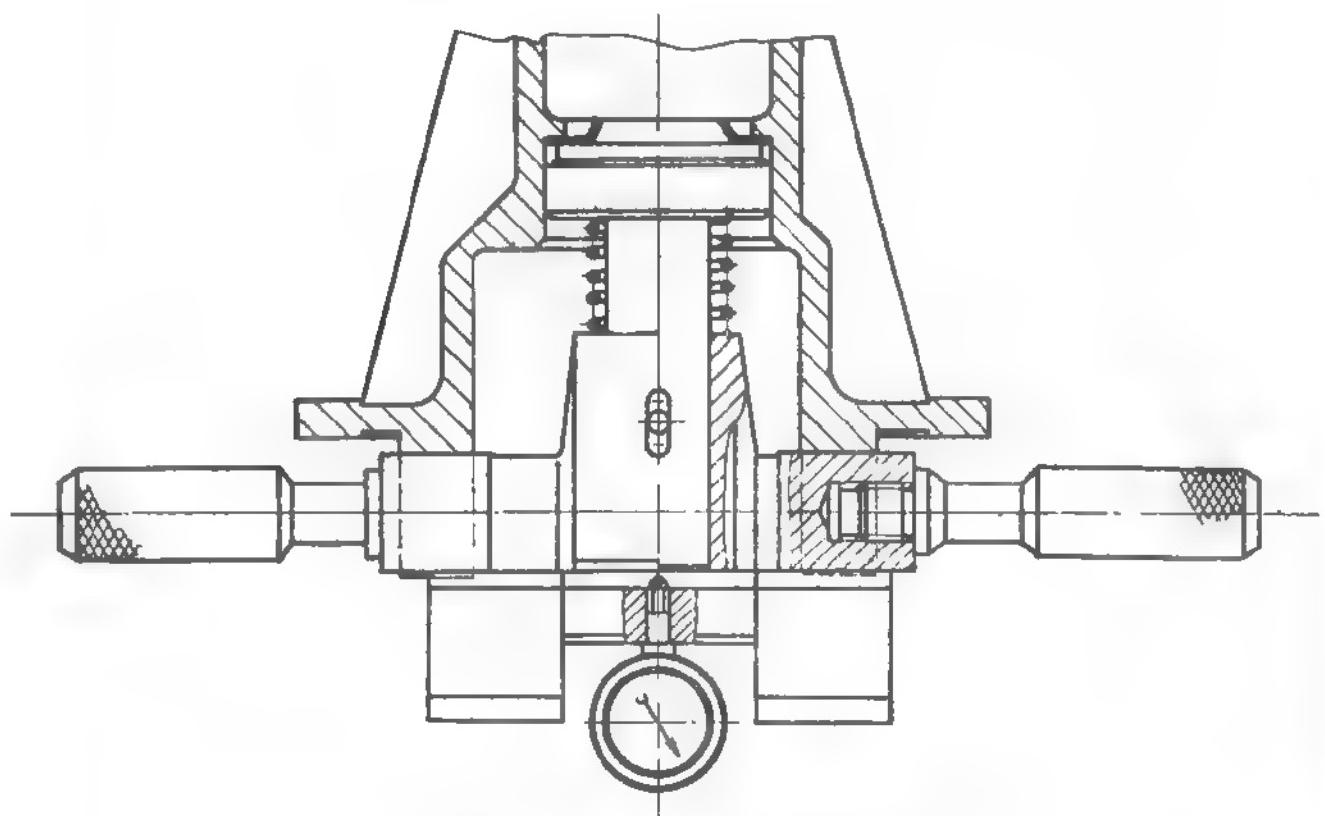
MEASURING DIMENSION "B" BY USING V 111
